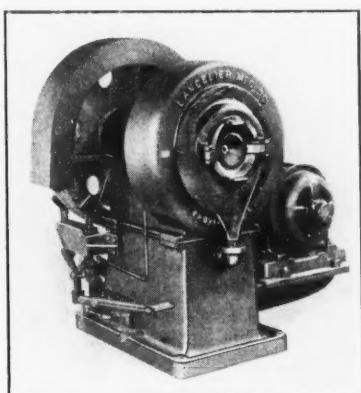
Swaging Machine for Pointing Rods that are Subsequently to be Drawn
